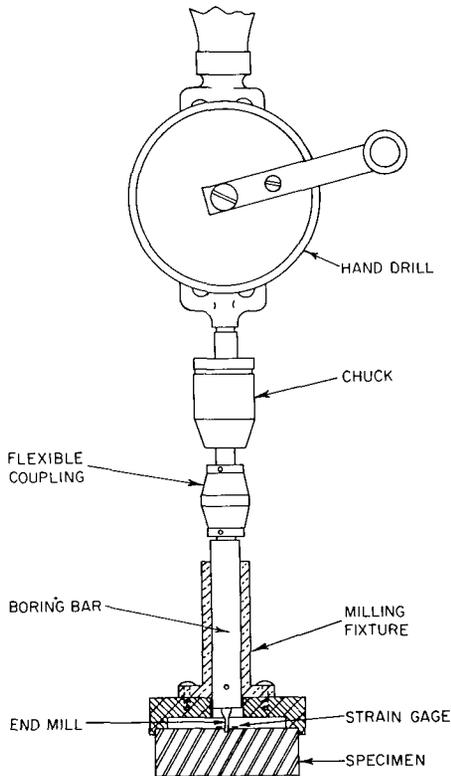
Assembled view of the specimen, milling fixture, and cutter-boring bar assembly. The milling fixture was located over the center of the gage rosette and held in position by a cross bar stop which was clamped to the specimen throughout the test. The milling fixture was clamped to the specimen only during a milling operation. It was removed prior to the reading of each set of strain measurements.
